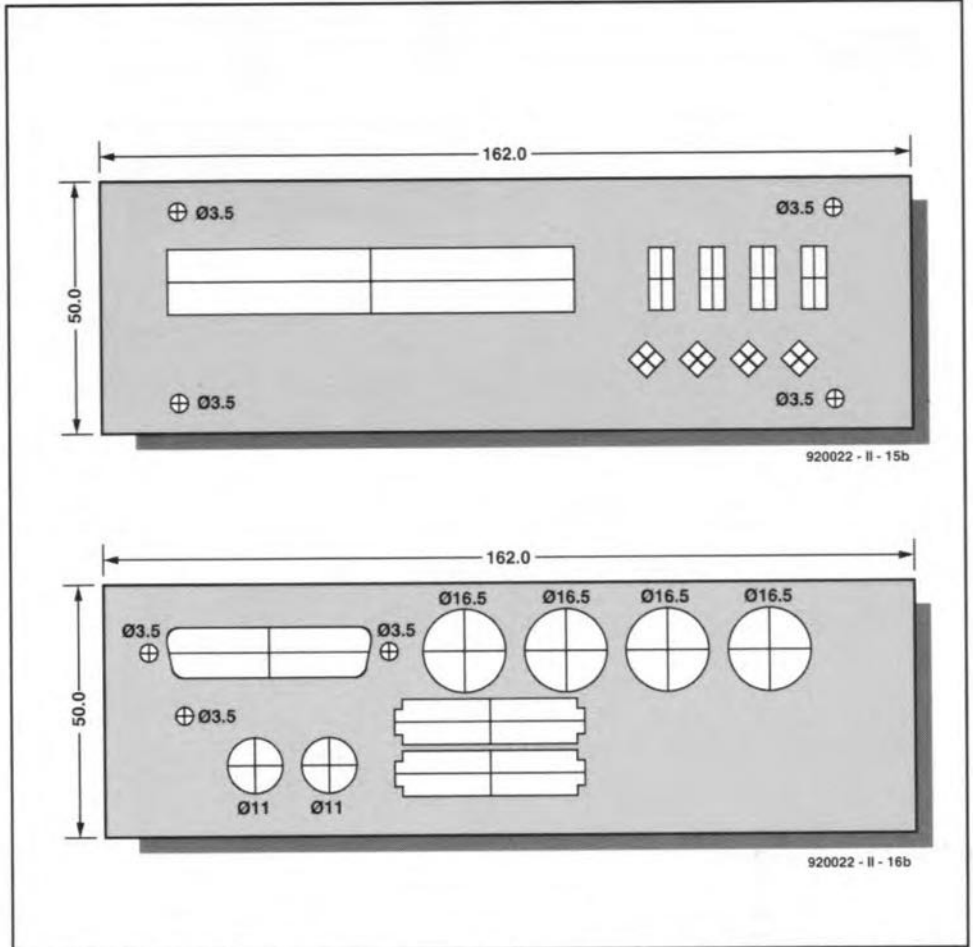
Keep to these cutting and drilling dimensions of the front and rear panel, and you are able to use the ready-made self-adhesive front panel foils supplied through the Readers Services (see page 110).
